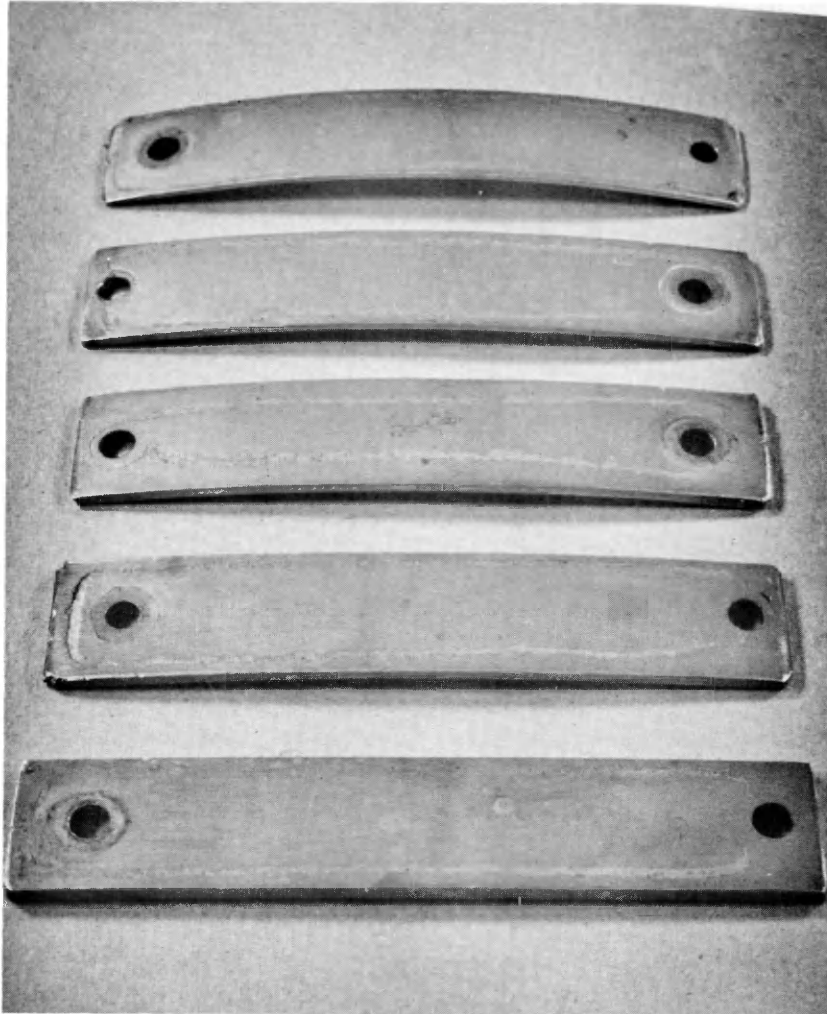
Deflected shape of the SAE 4023 Almen strips after being carburized and quenched. The carburized surface is convex.
